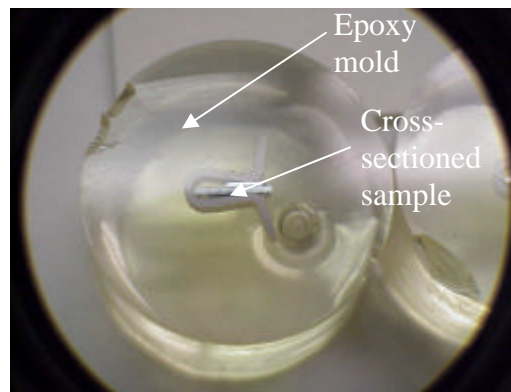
Cross-Sectioned Epoxy Mold Containing Bonded Chip
